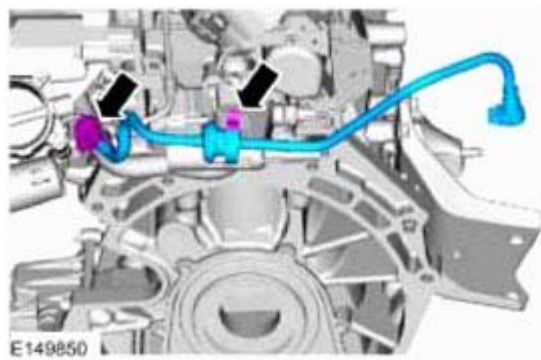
Locating Hose Quick Release Coupling And Retainer
